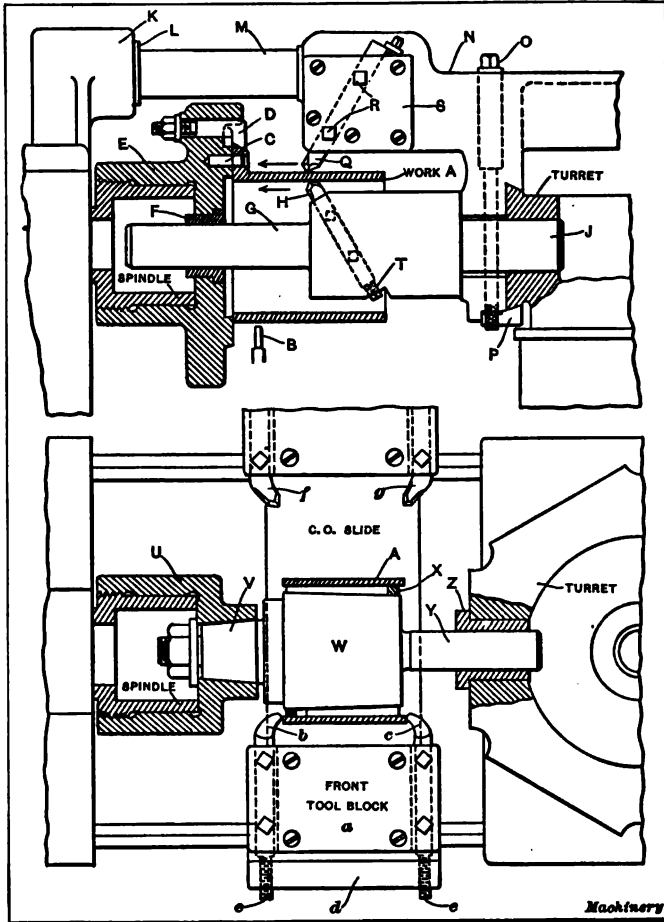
Machining a Sliding Sleeve in a Turret Lathe
